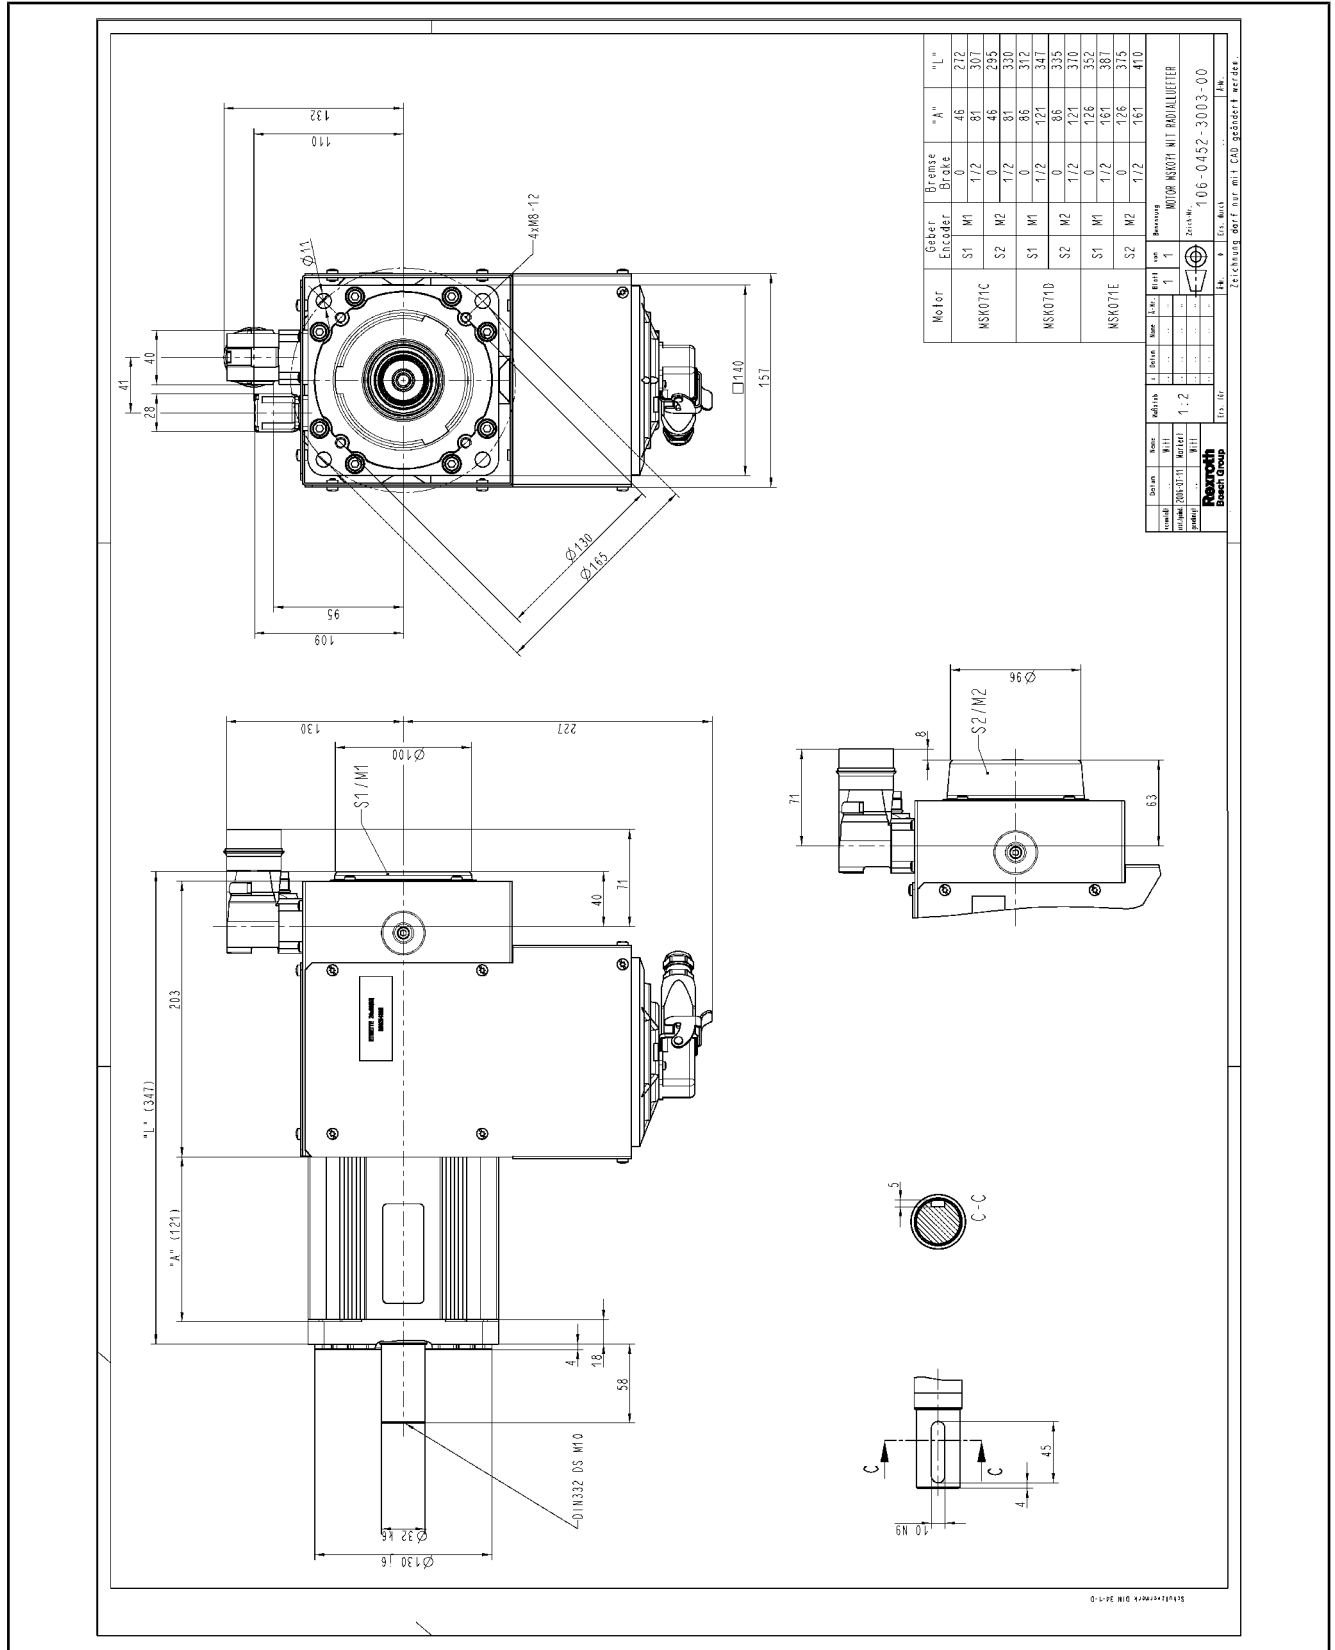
Dimension sheet MSK071 with radial fan unit
